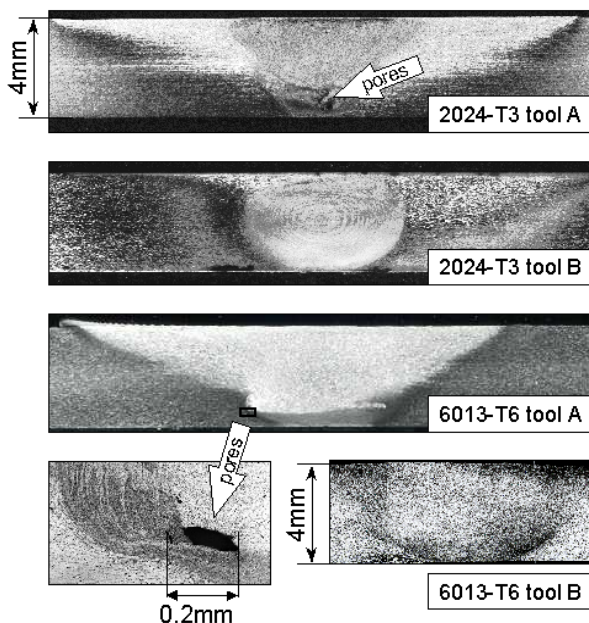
Cross sections of the friction stir welded joints.
